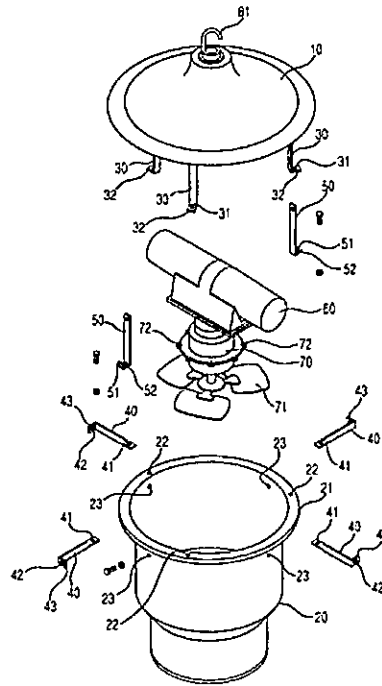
shows an exploded perspective view of the apparatus for capturing the insects in Fig. 1.
